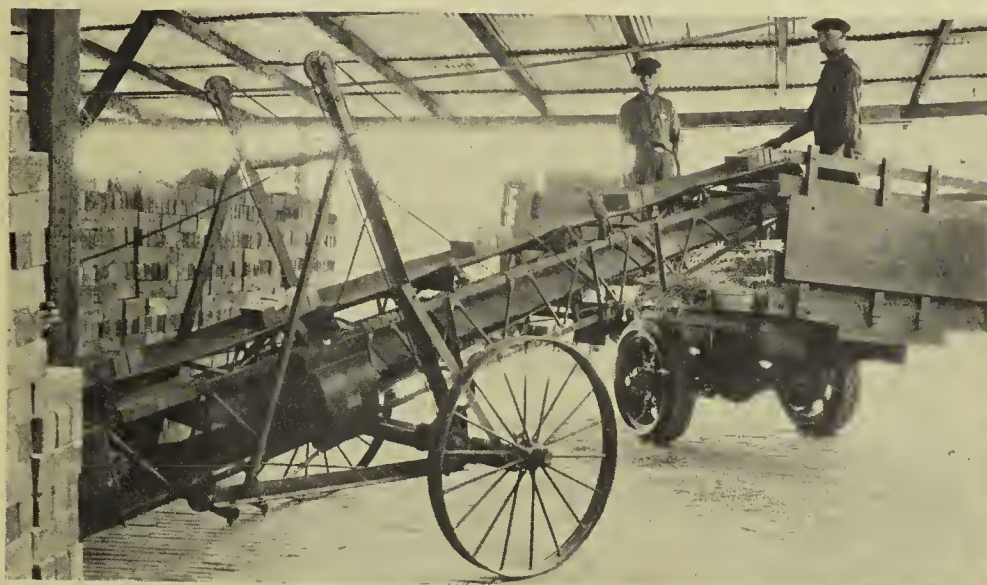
One of the Two Barber-Greene Electric Portable Brick Loading Conveyors in Use in the Stock Shed. They Are Used Whenever the Trucks Cannot Get Along Side of the Stock Piles.
